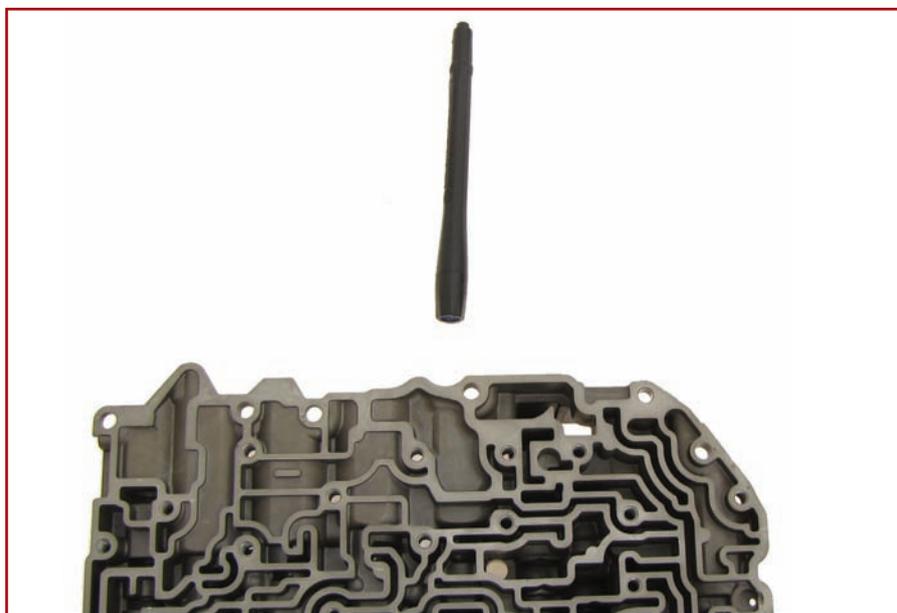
An inexpensive LED pen works well to shed light on worn valve bores.
